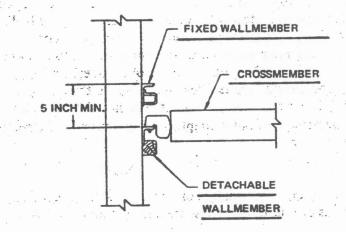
PIN-TYPE LOADER, SHOWING PARTS
